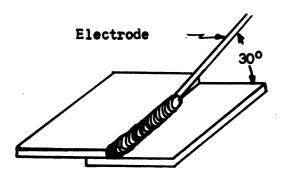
Position of electrode and plates for running fillet weld.
